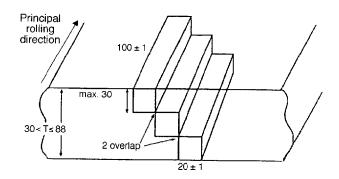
Test specimen location for plates over 30 mm to 88 mm, inclusive (all dimensions in mm)
